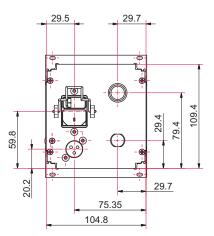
Dimensions DCU 180, DCU 310, DCU 400
